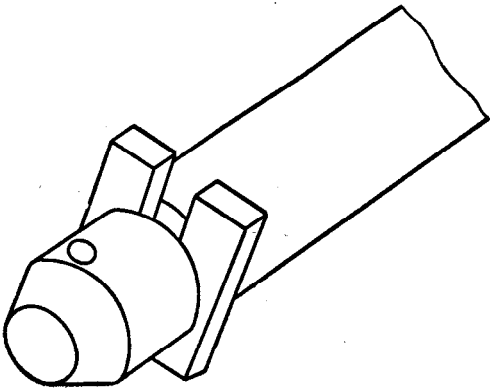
SPHERICAL END-PIECE IN POSITION SHOWING SLIP GAUGE
